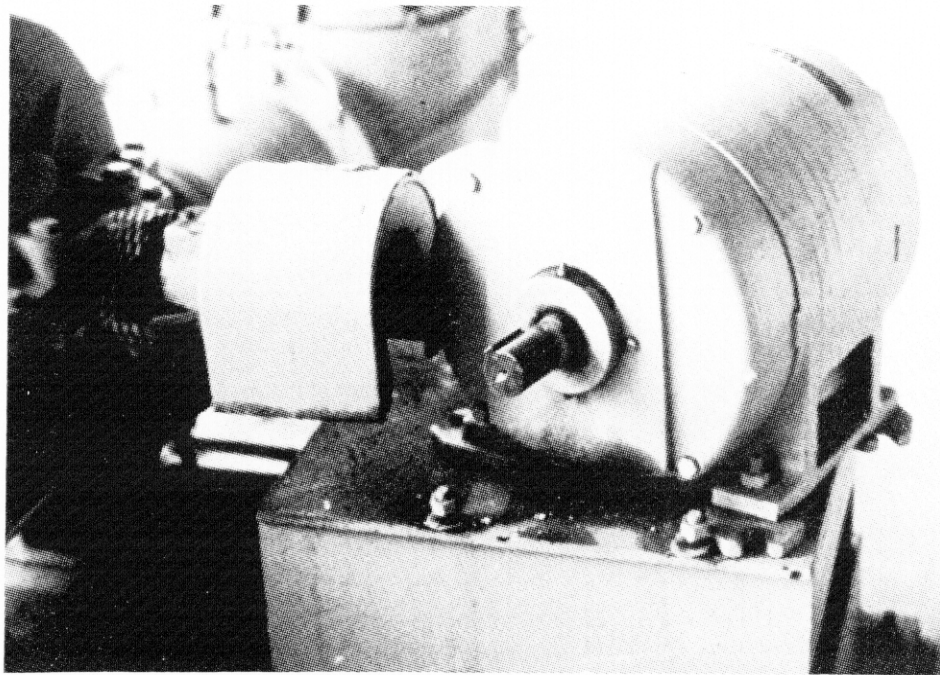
Unanchored Metal Lathe Susceptible to Sliding (Figure 4-69 of Reference 60)
